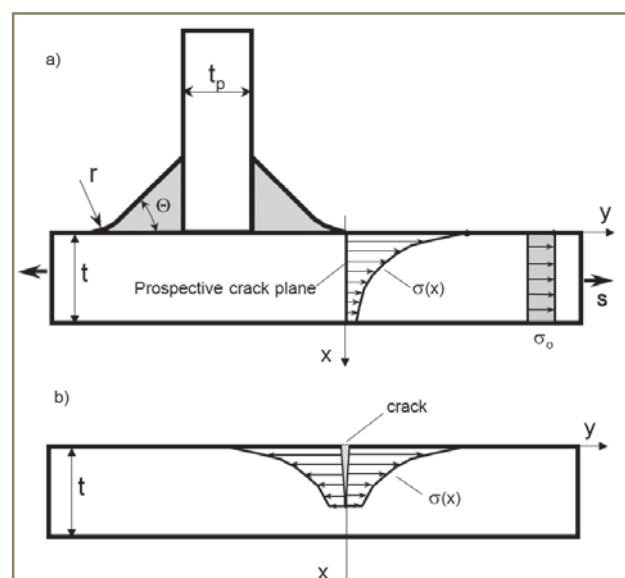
The use of the weight function for an edge crack in plate for calculating the SIF for a crack in a T-butt weldment
